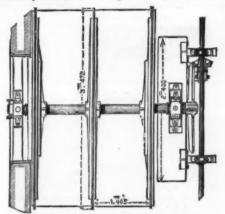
ECHANGEUR, SECTIONAL PLAN.
